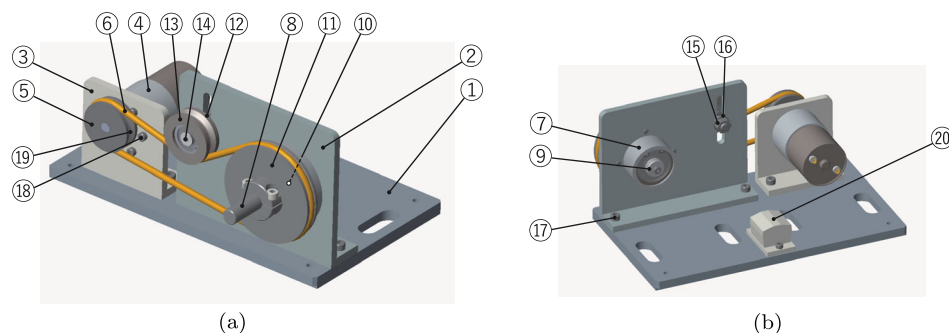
Part numbers of the belt drive unit. (a) Front; (b) Rear.
